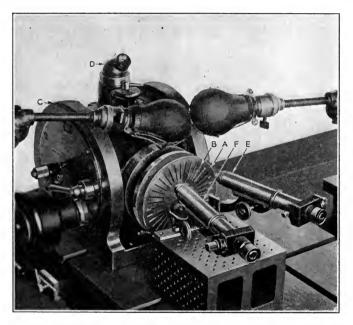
Fixture for checking spacing of slots in stroboscope disk.
